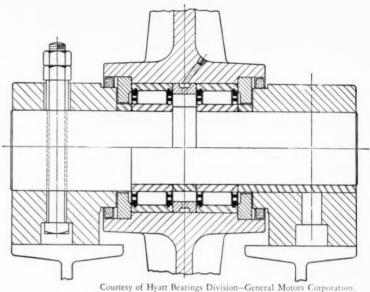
A crown block cable sheave showing manner of installing Hyatt roller bearings.
